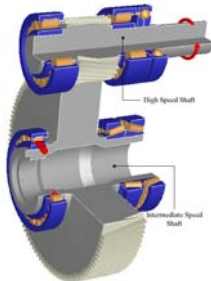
The model of the helical wheel stage for 2MW Wind Turbine
